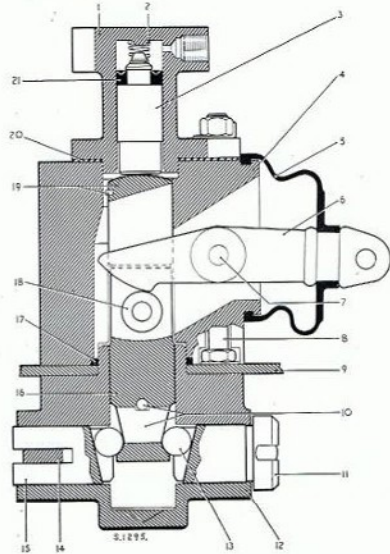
Sectional view of the combined expander assembly and the rear wheel cylinder
